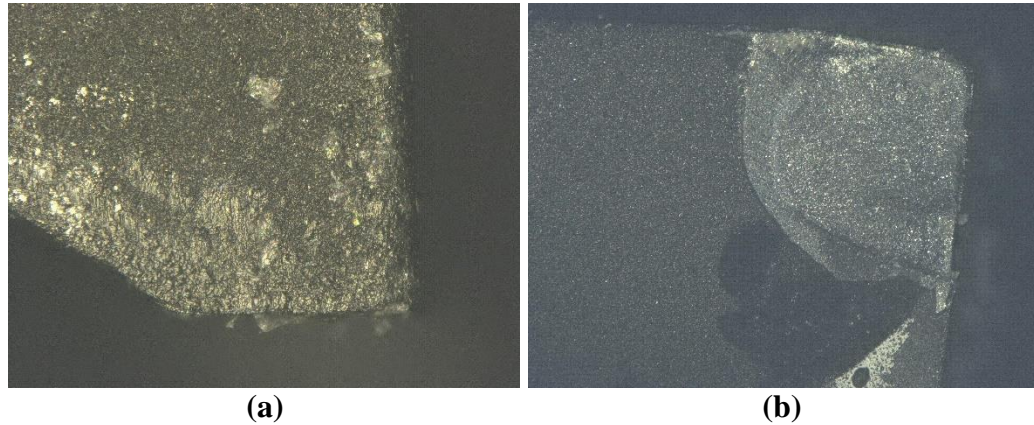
(a) Tool damage on CVD diamond coated end mill prior to cutting test 7 (b) Crater wear from prior tool damage after cutting test 7.
